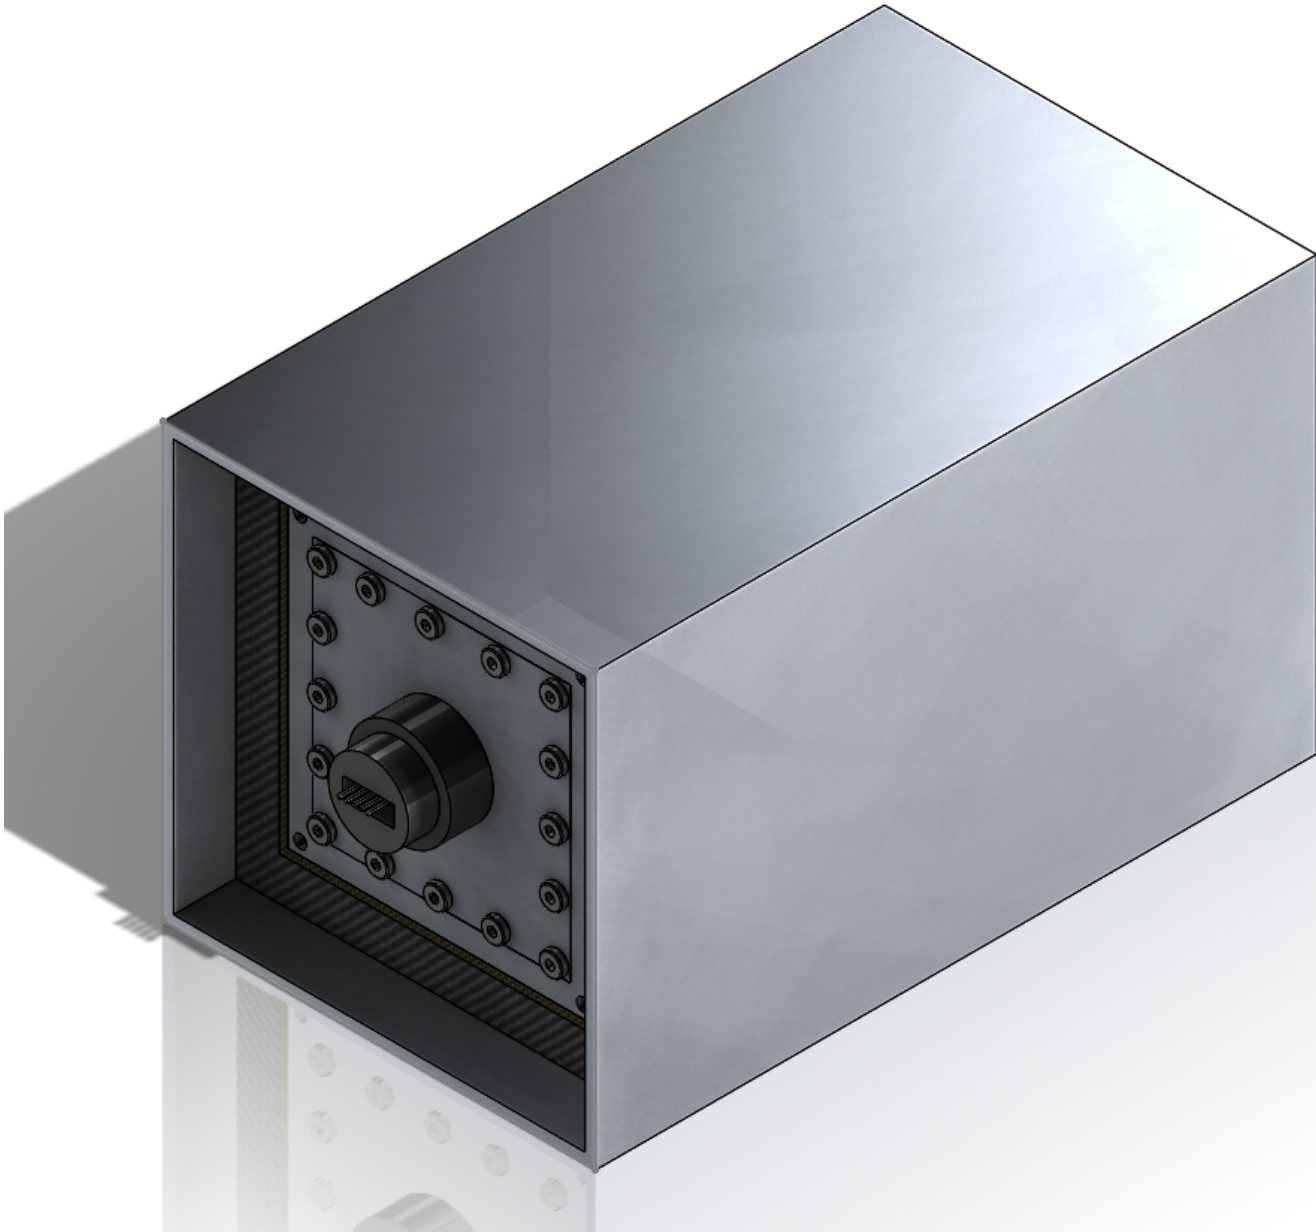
Isometric view of the ISS showing the casing of the pressurized inner container.
